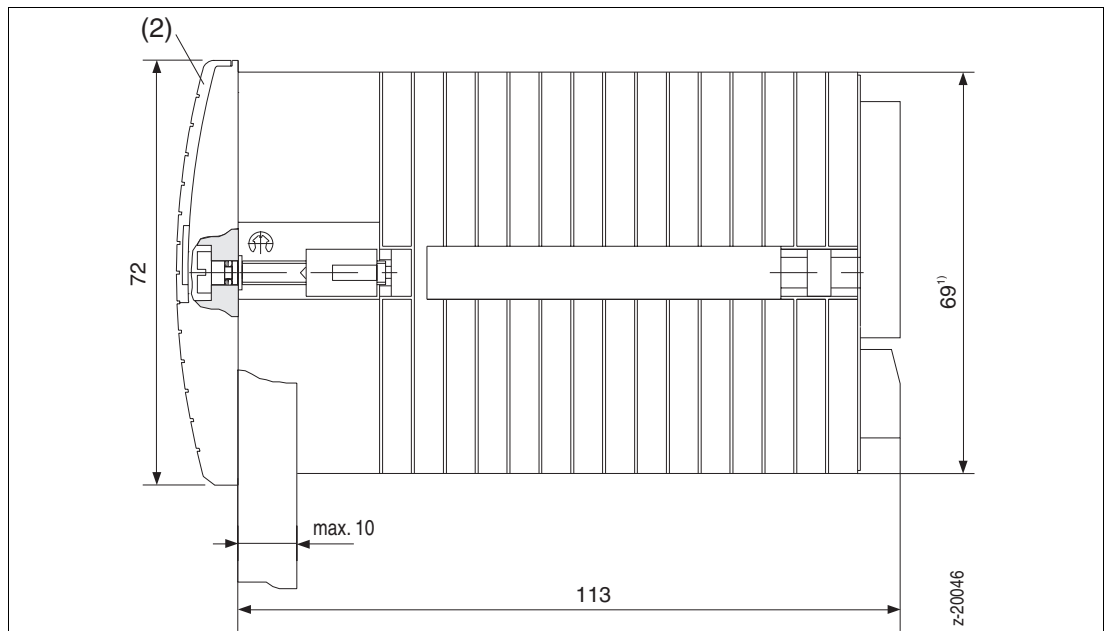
Dimensional drawing, side view, rear part of the housing removed (all dimensions in mm)
